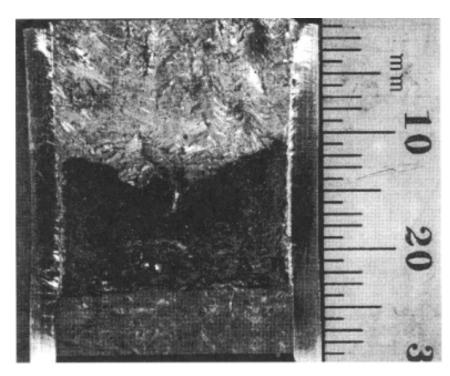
Fracture surface of aged weld metal PWER tested at 290°C
